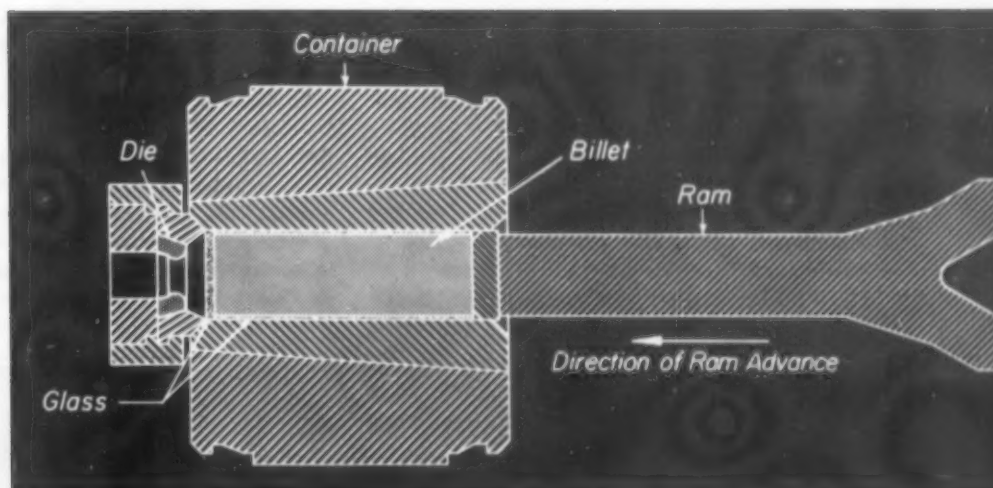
Method of Coating Billet With Glass for Extrusion of Solid Shapes by the Ugine-Séjournet Process
